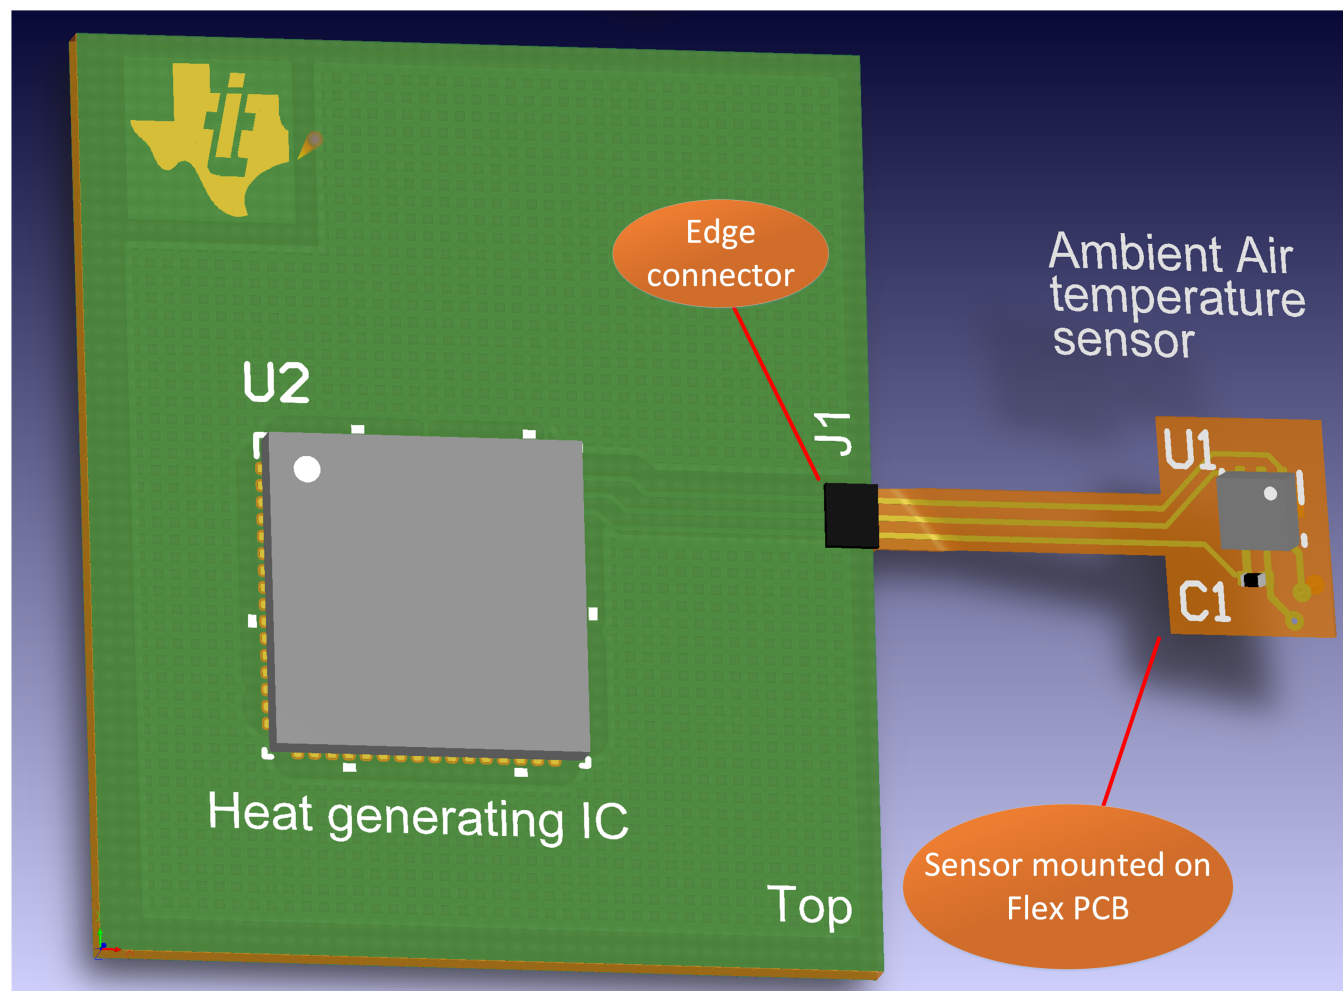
Dedicated Sensor Flex PCB with Edge Connector
